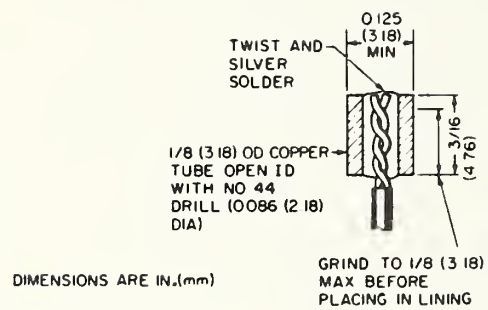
TYPICAL PLUG THERMOCOUPLE ASSEMBLY
